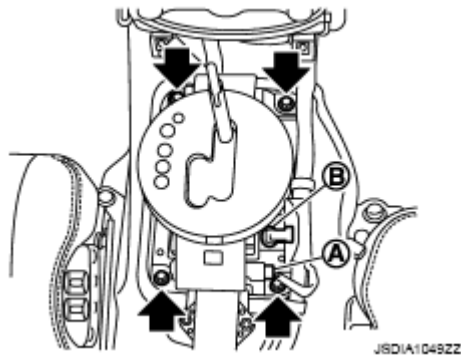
Locating A/T Shift Selector Assembly Mounting Bolts
